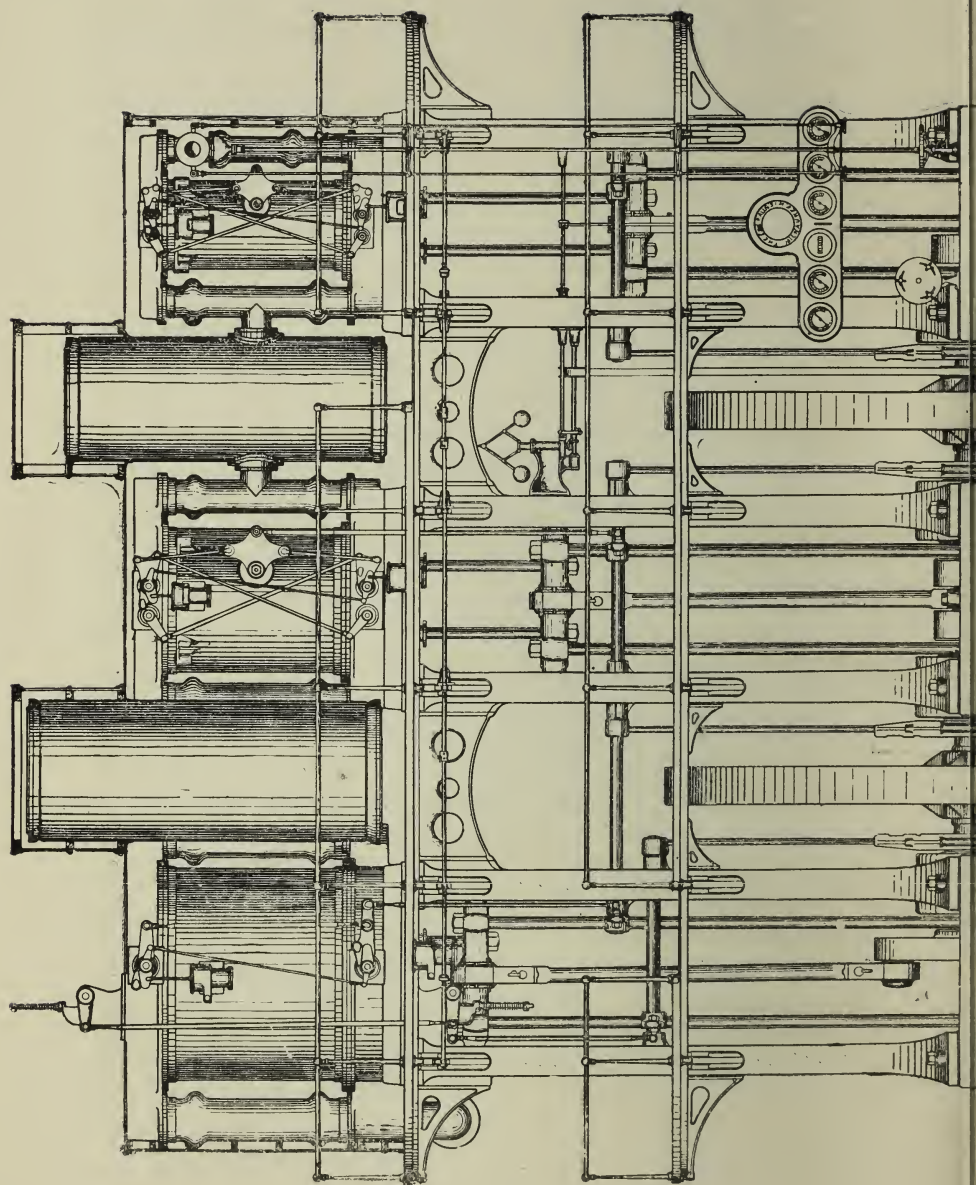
GENERAL PLAN SHOWING ARRANGEMENTS FOR TESTING.
